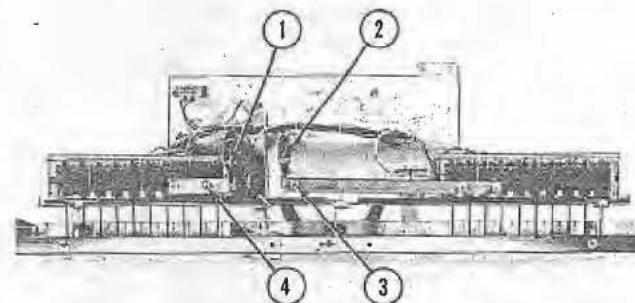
CONNECTOR LINK ADJUSTMENT, 2410
